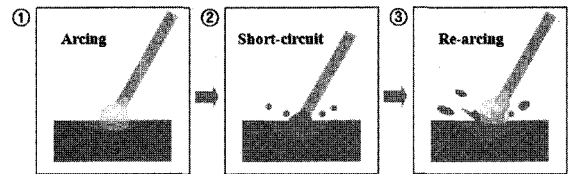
Three steps of dip-transfer DC GMA welding
